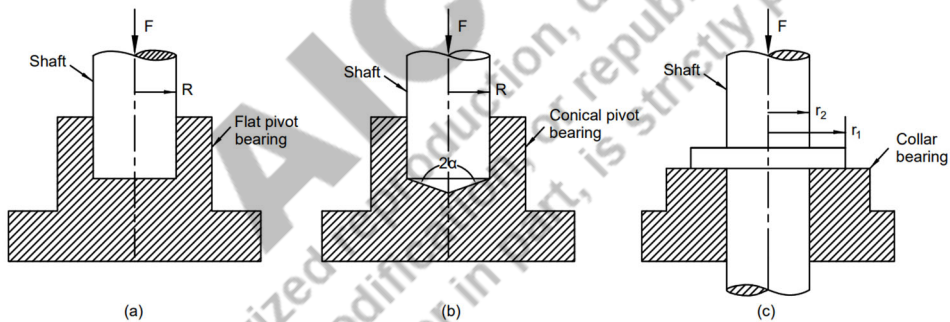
Pivot bearings: (a) Flat type, (b) Conical type and (c) collar type.
